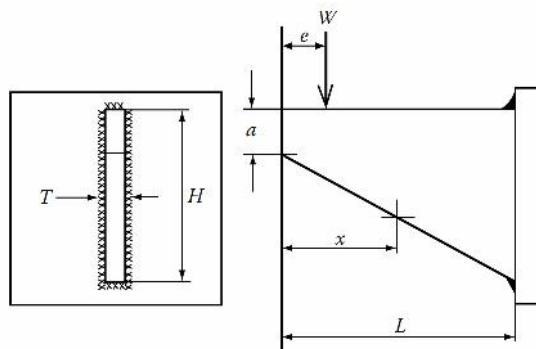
Trapezoidal plate plane loaded parameters [H02];
